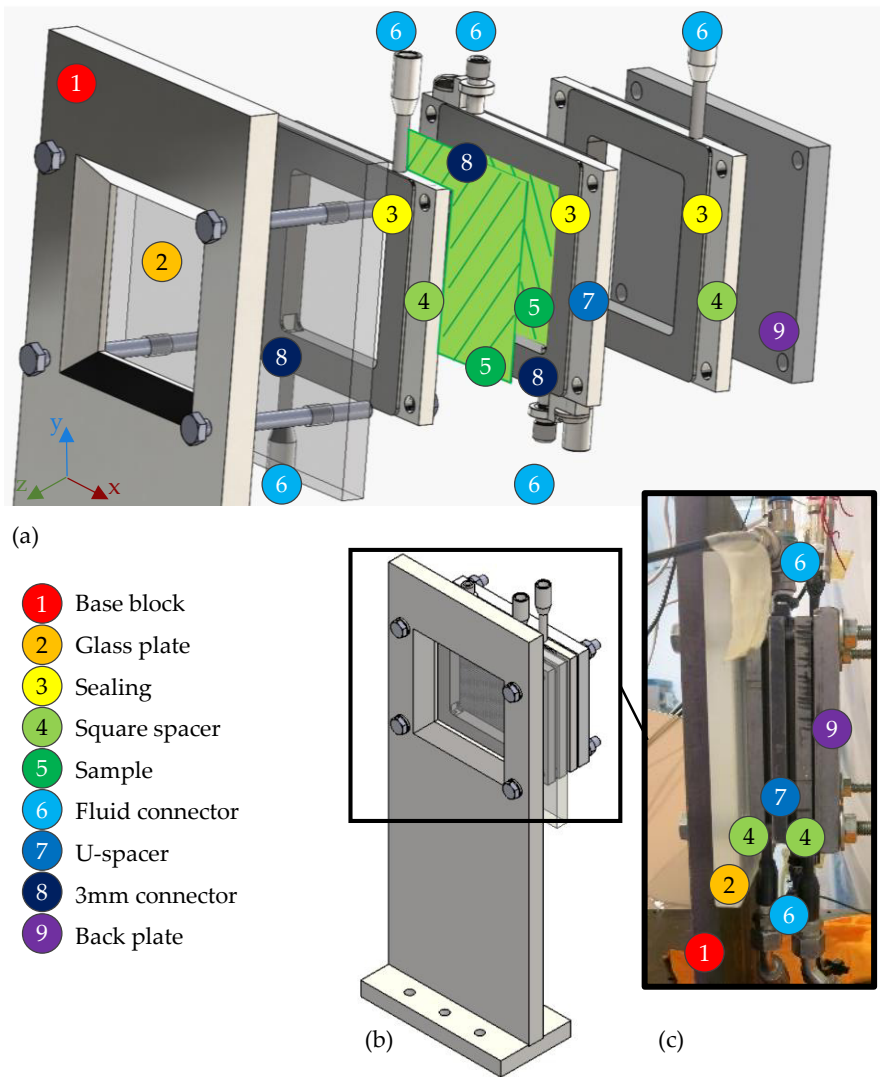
Assembly of the clamping unit around the sample, (a) exploded view of the 3D CAD model, (b) 3D CAD model, (c) photo
